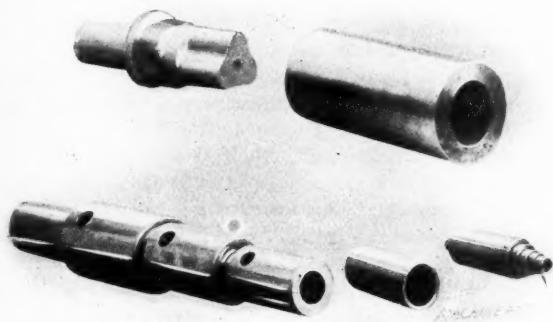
Samples of Turning and Boring produced by the Attachment.
